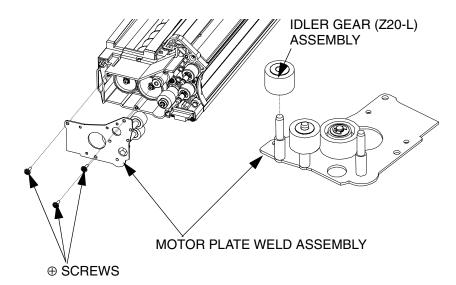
Removal of the Idler Gear (Z20-L) Assembly
